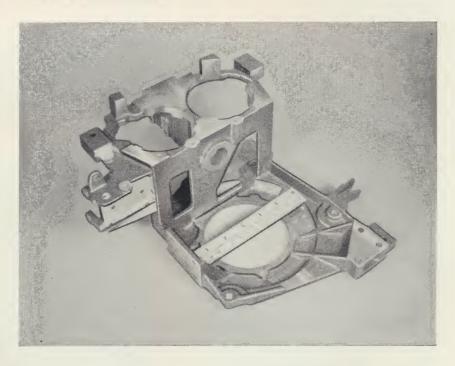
Complex antenna mount machined using two setups and two tapes. Sixty-one holes are centered and drilled, forty are counterbored, and thirty-two tapped. Ninteen surfaces are also milled. Machining time is eighty-one minutes.
